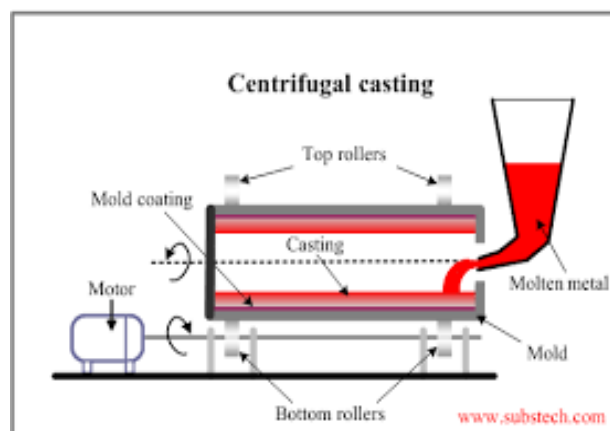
CENTRIFUGAL CASTING PROCESS
